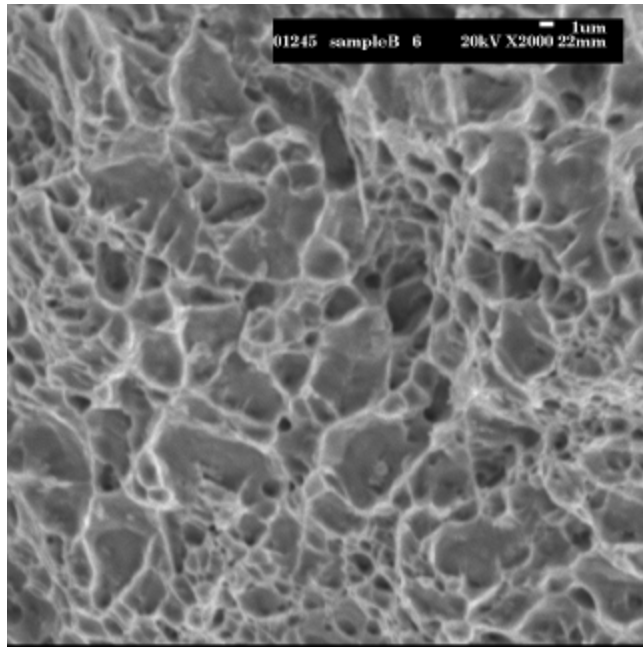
Scanning electron micrograph of fracture surface from welded tensile sample with lack of fusion defect. The location pictured is away from the weld defect, here deformation and fracture occurred in the heat affected zone. Failure here also occurred by ductile rupture.
